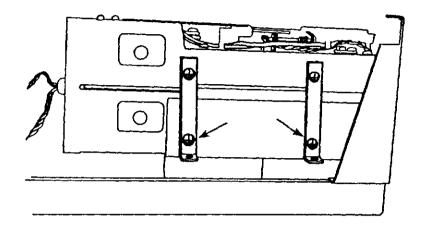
A: MD I/MD III Drive Removal - Revision B and C Chassis
